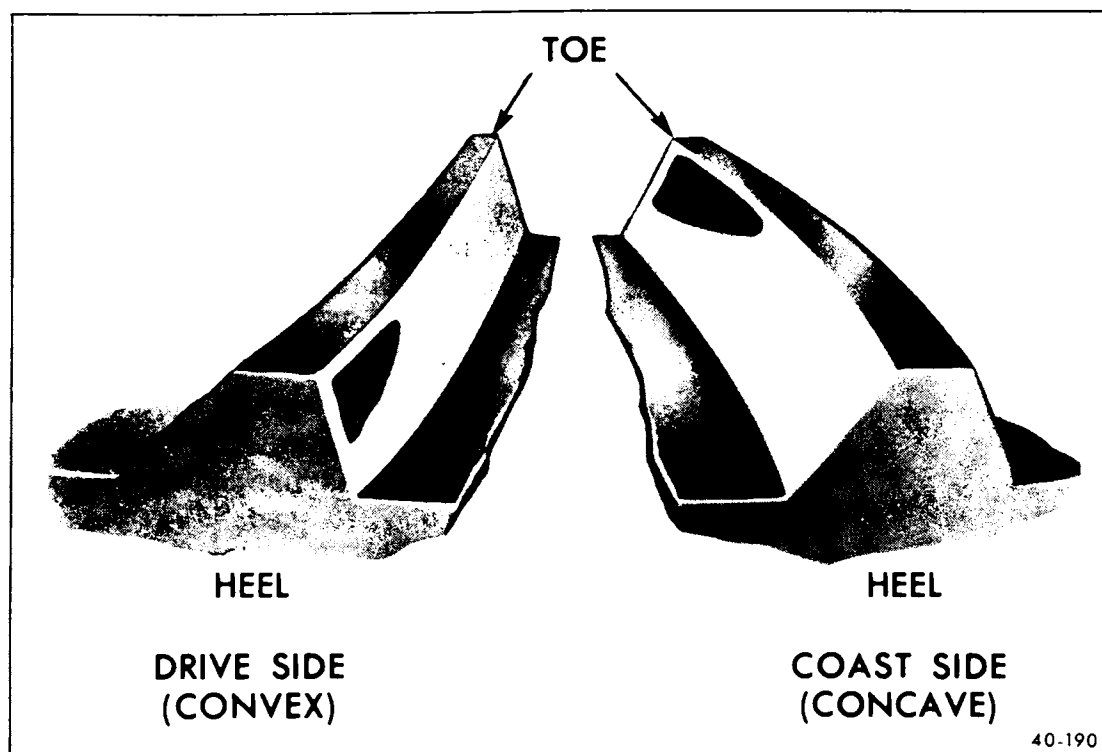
Tooth Pattern - Pinion too Far Away from Ring Gear
